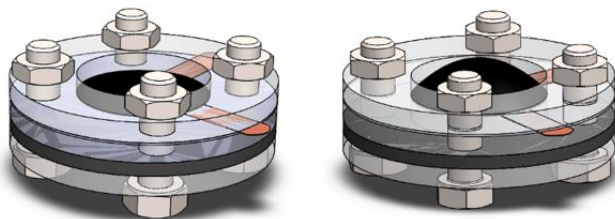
DEA assembly before and after inflation using syringe [149]
